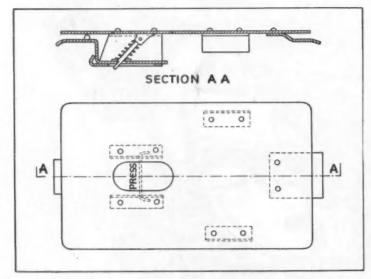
Showing the fastener on a He. 111 inspection cover.
